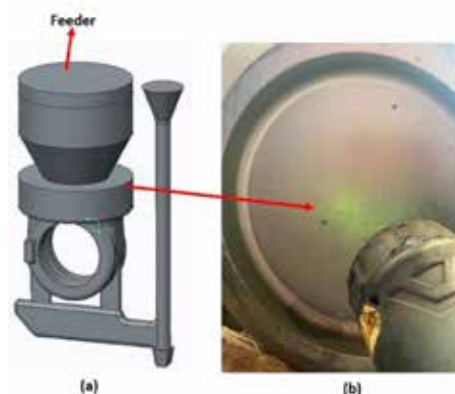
(a); The image of the molding design of the casting part, (b); The locations and morphologies of the defects on the flange of the casting part under UV light after machining.
